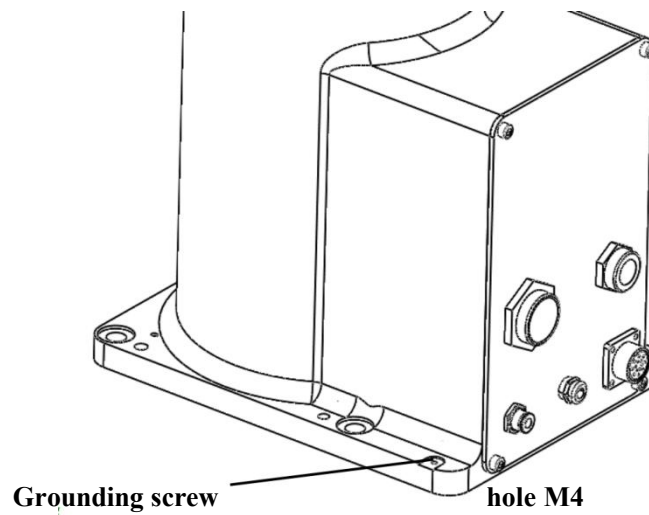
H10-1500 and H16-1200 robot grounding screw holes
